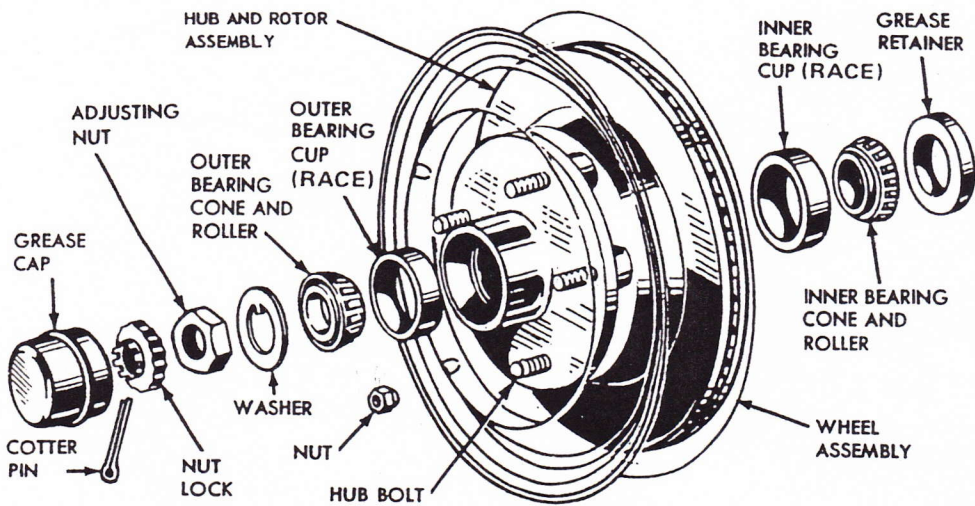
Assembly of a Wheel. (Courtesy of Ford Motor Company)
